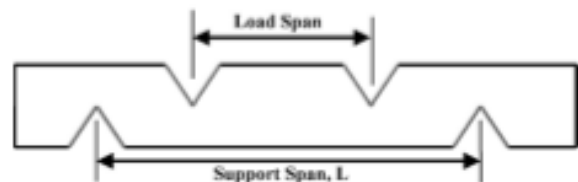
Fixture Used to Align Loading Noses and Supports
